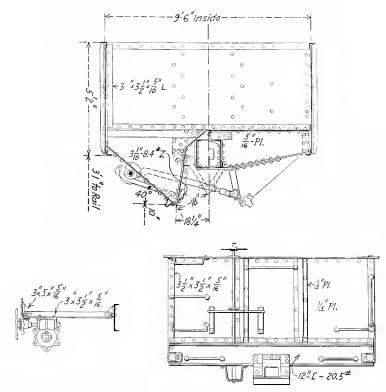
Cross Sections and End Elevation of All-Steel 50-Ton Capacity Center Dump Gondola Car Shown in Fig. 326.
